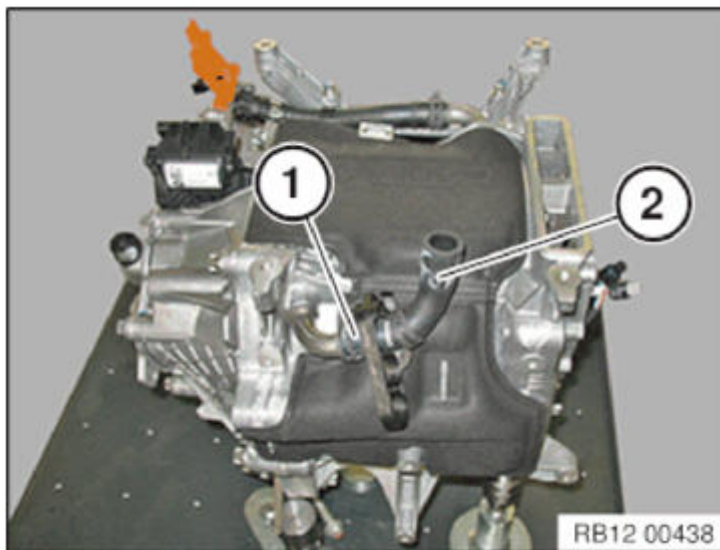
Identifying Support Plate, Clamps, Sound Insulation And High-Voltage Cable Attachment Point
